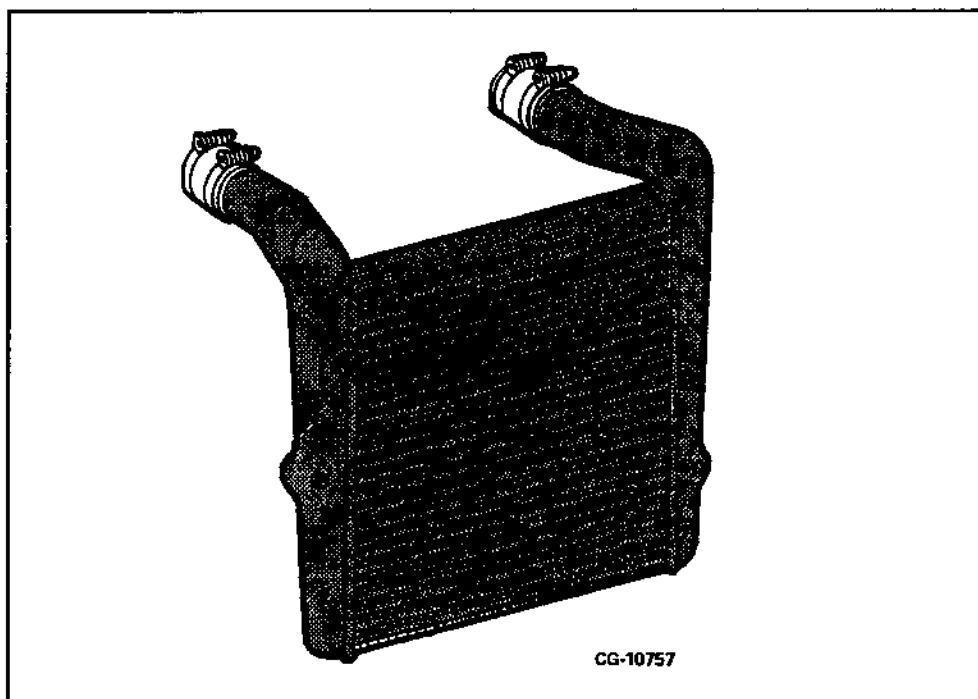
Chassis Mounted Air-to-Air Intercooler
